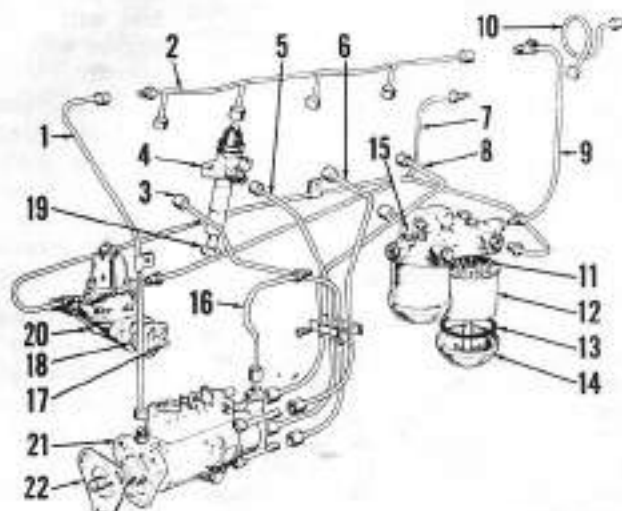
Drawing showing lay-out of model 990 fuel injection system. Fuel lift pump (20) is located on right side of engine; the fuel filter and fuel injection pump are located on left side of engine. Return line (10) returns flow of fuel from pump return line (1), injector leak-off line (2) and filter return line (9) to fuel tank. An assistant to operate primer lever (20) while bleeding the fuel system will be helpful.
